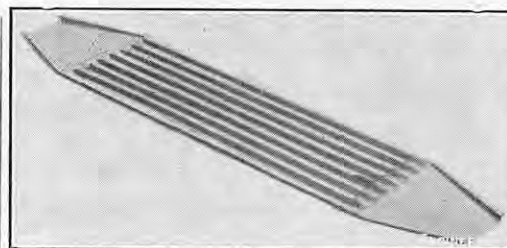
CORRUGATED PLATE READY FOR WELDING.
